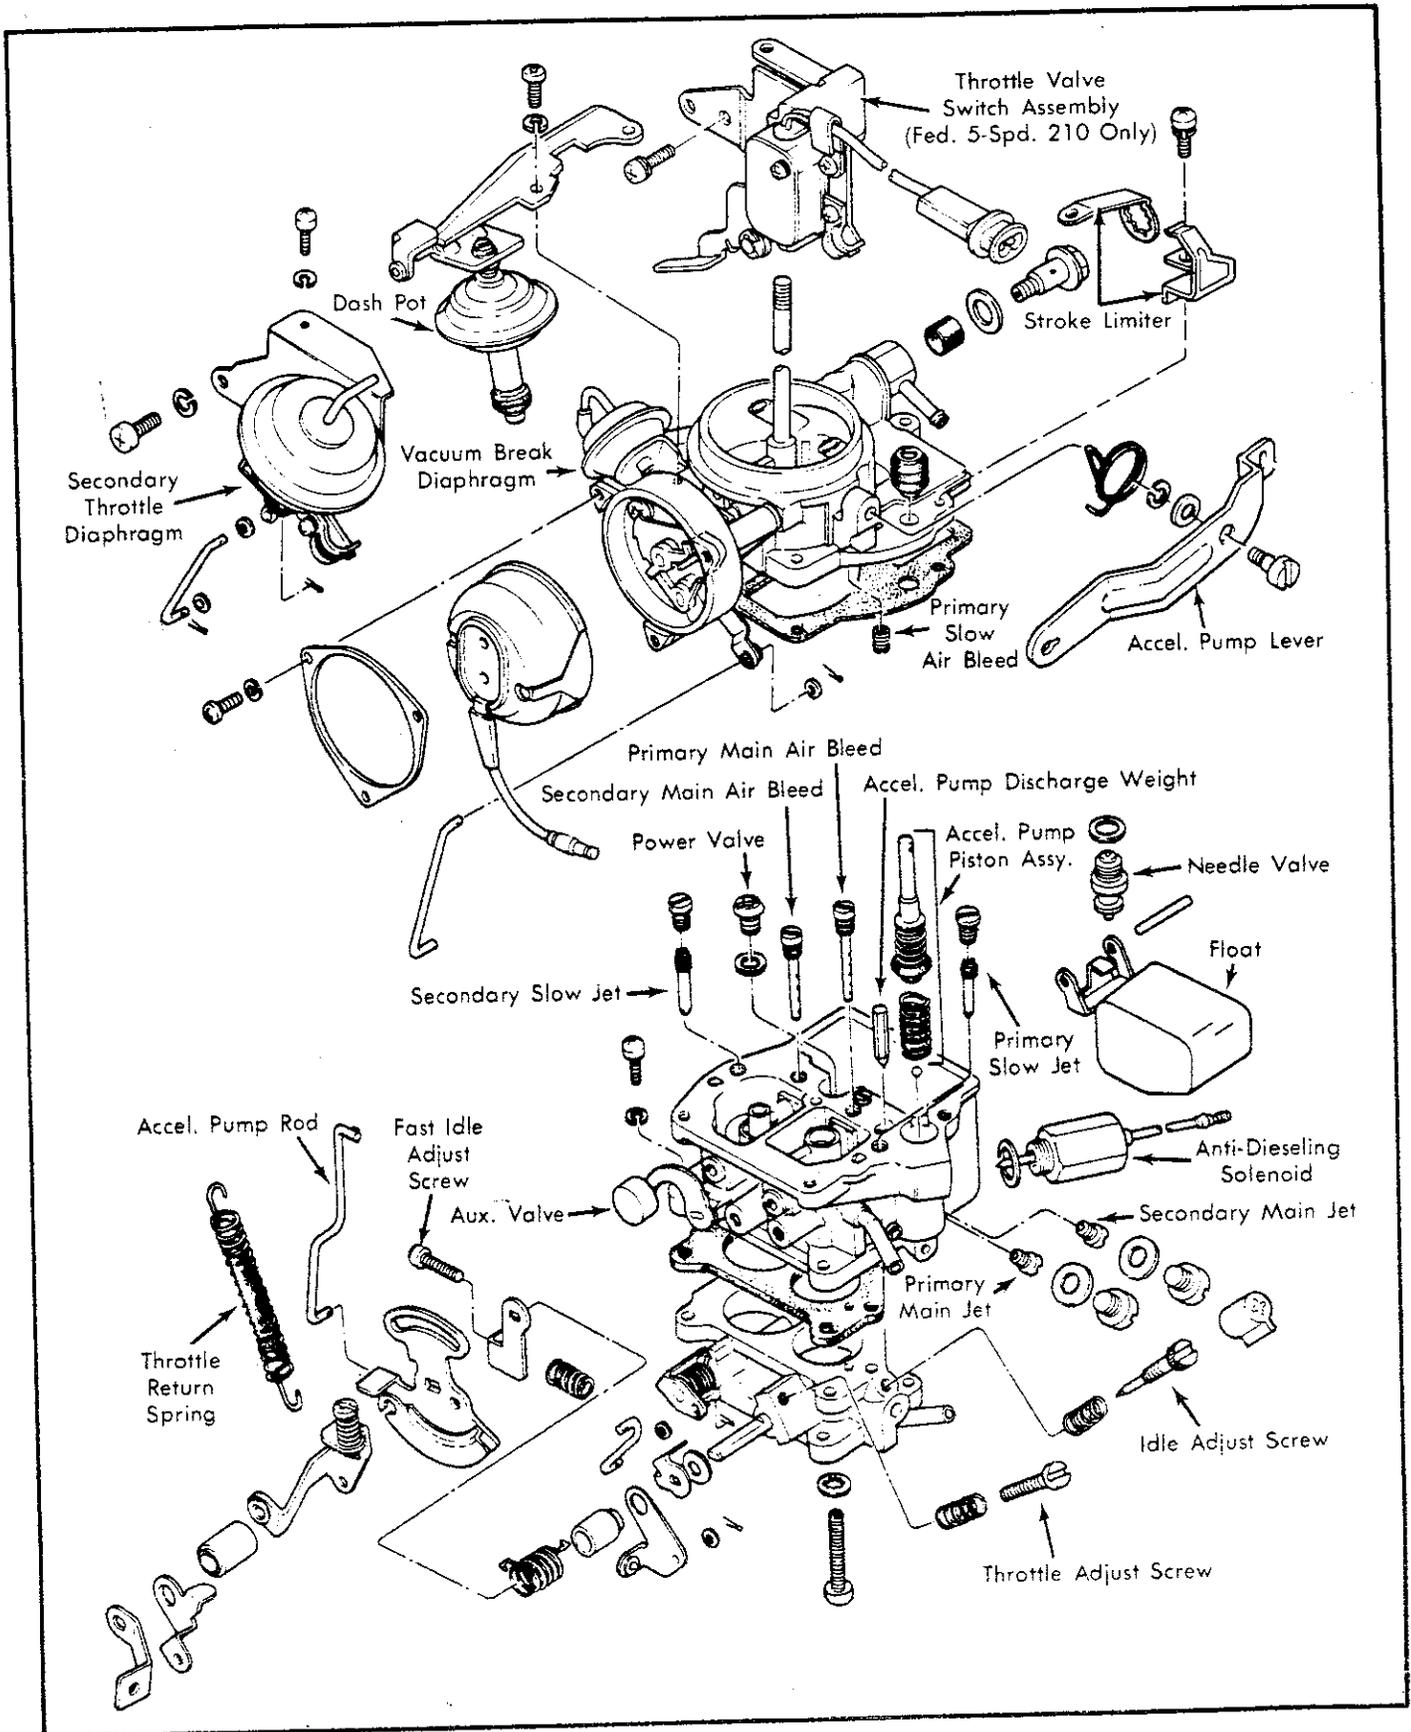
Exploded View of 1979 Datsun 210 and 310 Hitachi Carburetor
